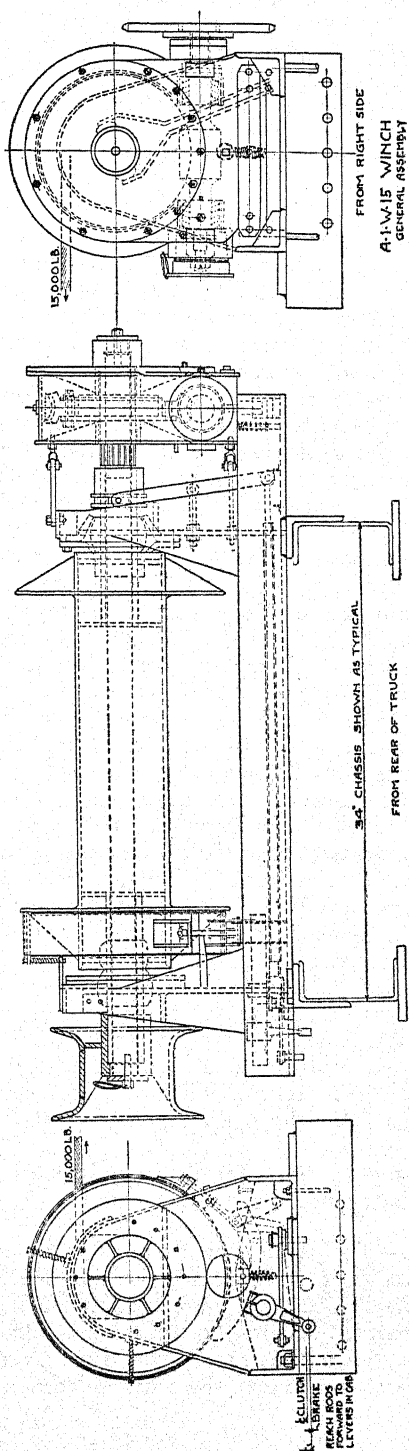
General assembly of arc welded motor-truck winch.
